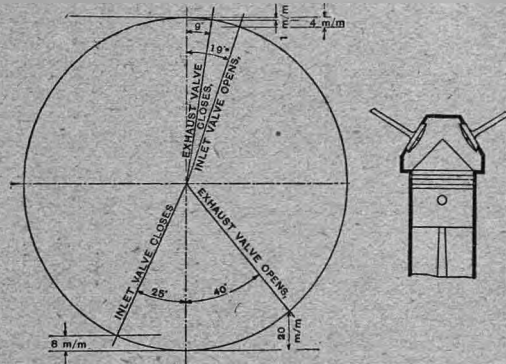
Valve diagram of a 15.9 h.p. experimental 1911 Sunbeam racing engine. The valve arrangement of the cylinder head is shown in the small diagram on the right.
